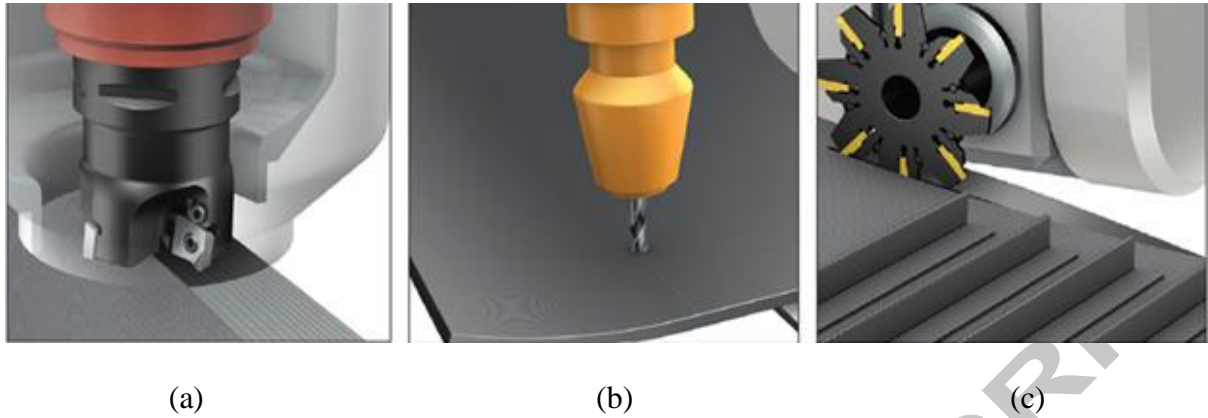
Machining of composite laminates (a) Milling (b) Drilling (c) Trimming [12] (From, Demeng C, Ishan S, Peidong H, Ping G, Kornel EF. Machining of carbon fiber reinforced plastics/polymers: a literature review. J Manuf Sci Eng 2014; 136: 034001-22. Reproduced with permission of ASME)
